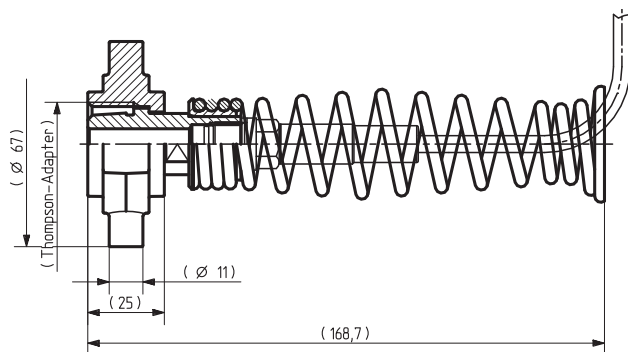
Fitted in Thompson adapter Type 7513A on indicator valve
